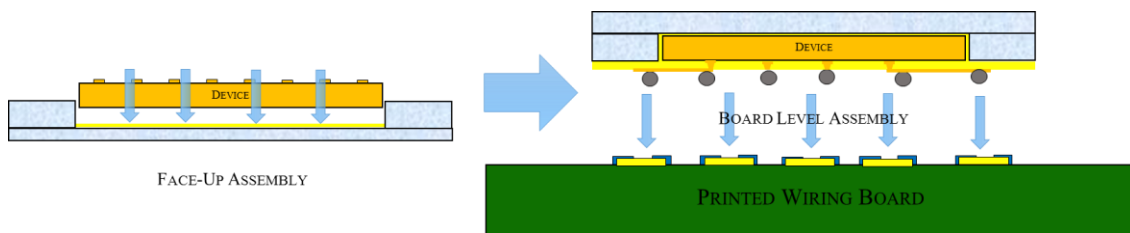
Concept image showing chip-first packaging architecture involving face-up die bonding followed by RDL fabrication and board level assembly
